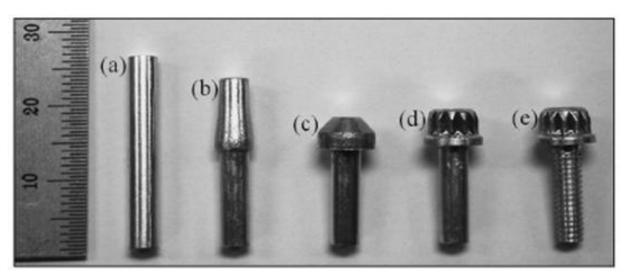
Three Basic of stages for forming bolts to ultra-fine-grained specimens: (a) as the engine, (b) first preform, (c) a second preform, (d) the final product, and (e) the bolt thread with the machine.
